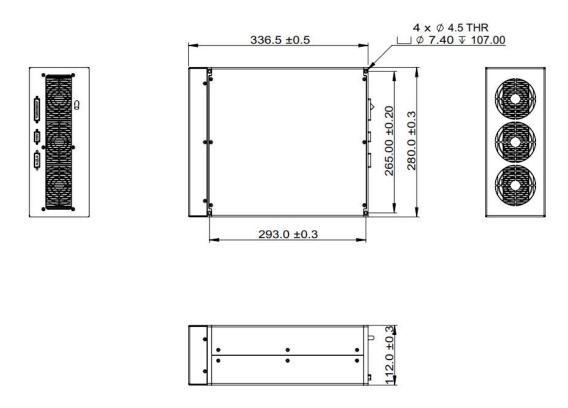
YDFLP-E-80&100-M7-M-R Laser Module Dimensions (Unit: mm)
